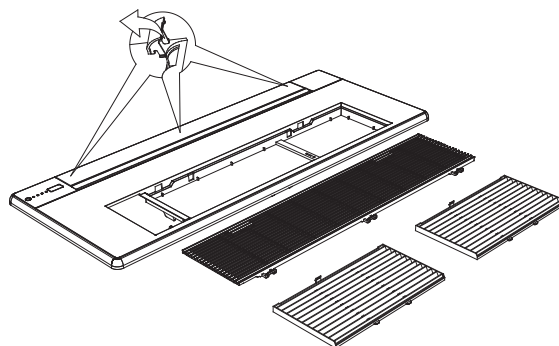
Open Fan Guide Vane and Remove 3 Concealed Cap Screws
